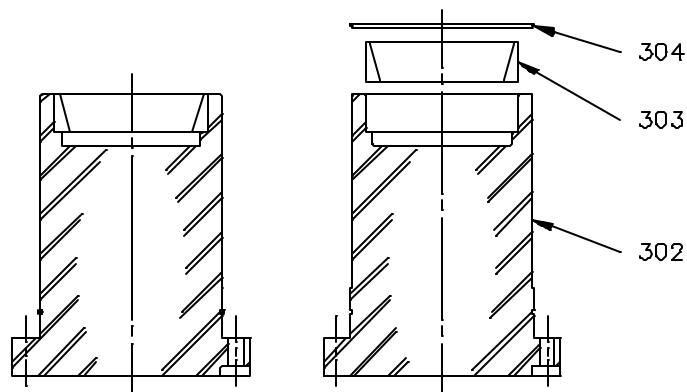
Lower Pinion Shaft Bearing Cap Assembly [301]
